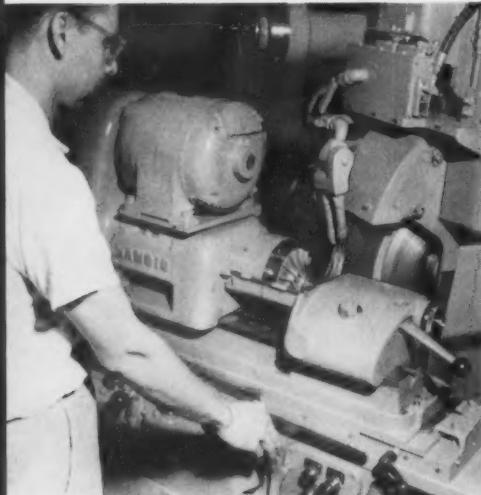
This Landis Type CH grinder is specially adapted to finish grinding of contoured edges of aluminum turbine wheel vanes.
